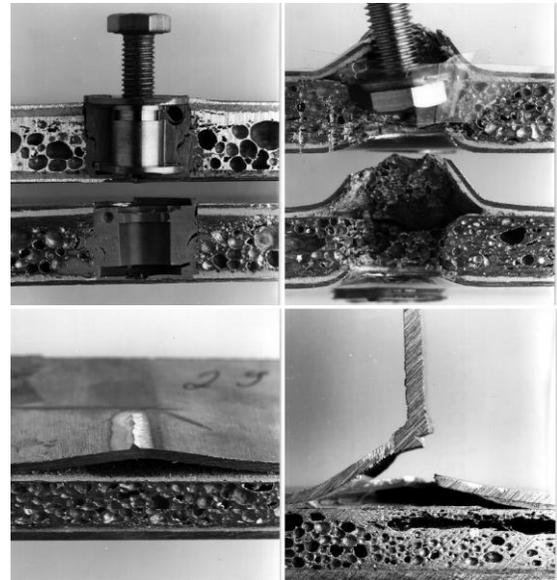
Aluminium foam samples with various fastening elements after testing. Upper part: face sheets 0.8 mm, PU-base adhesive in both cases, left: glued insert M6; right: through bolt, M8; lower part: face sheets 2 mm and welded iron angle in both case. [20]
